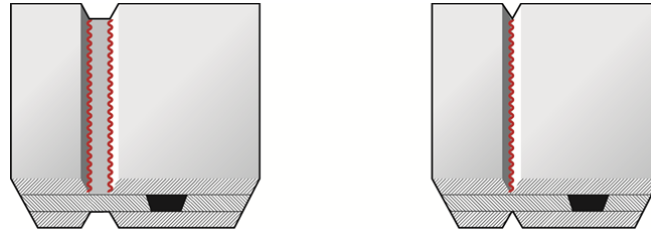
The picture shows the comparison between a double welding line for the big gap and a single welding line for the small gap
